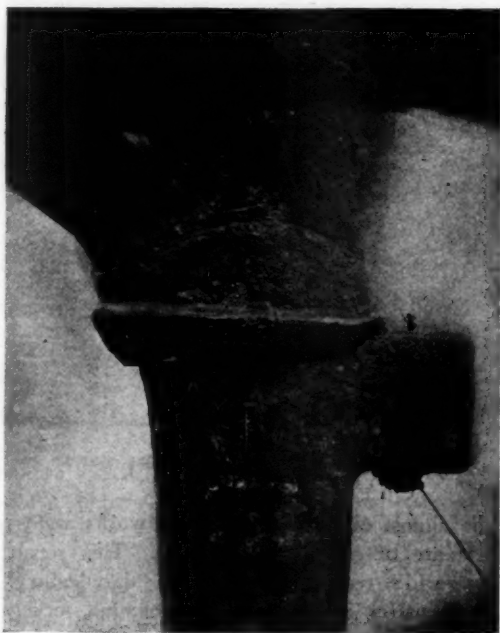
CLOSE-UP VIEW OF FINISHED WELD
